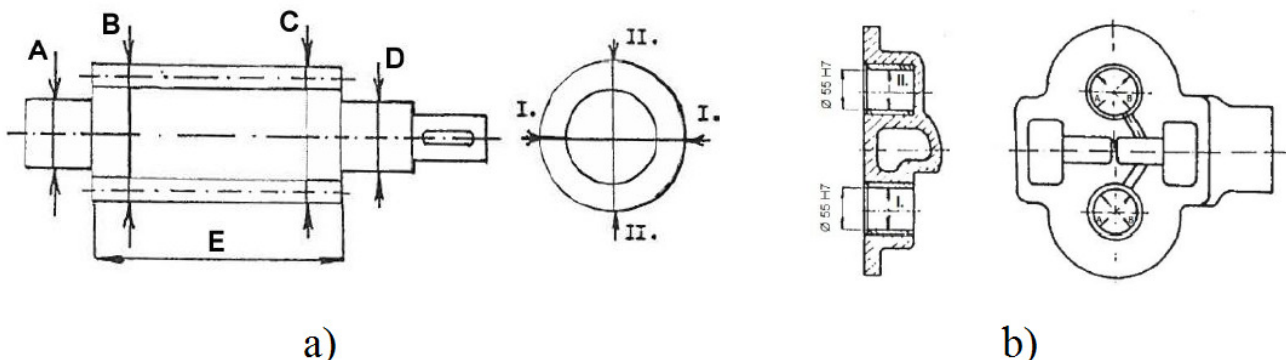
The measured dimensions of the parts a) driving wheel b) front cover [8]
